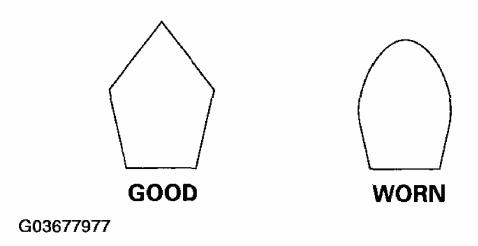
Inspecting Teeth On Each Synchro Sleeve And Matching Teeth On Each Gear For Wear
